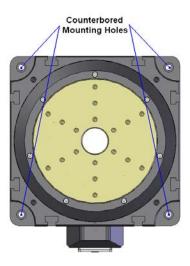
Top View of an ABRT-200P Stage Showing Mounting Holes
